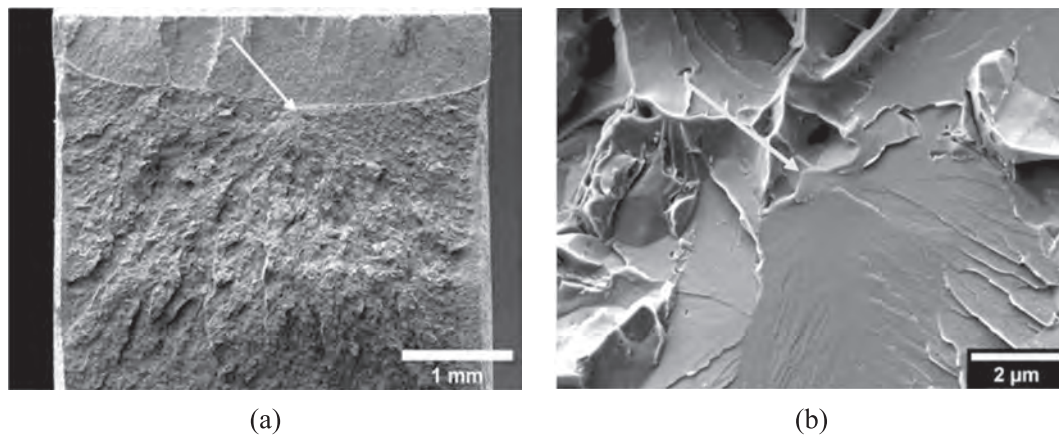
A) fracture surface and b) nucleating particle of the axially orientated beltline weld miniature C(T) specimen.
